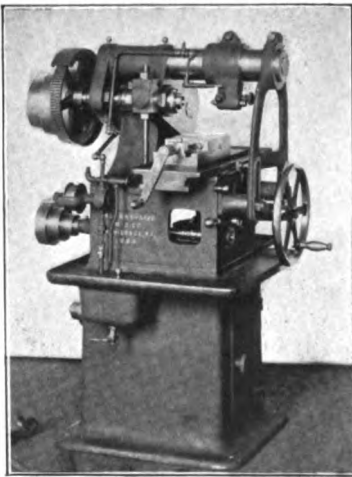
OBSOLETE TYPE OF MILLING MACHINE WITH EXPOSED GEARS
